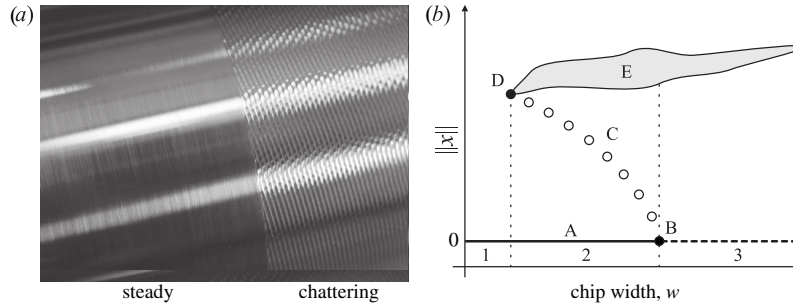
Panel (a) shows a photograph of a machined workpiece. The smooth surface to the left was produced by steady cutting, whereas to the right we may observe so-called *sunflower spirals* which are a typical result of tool chatter (photograph provided by Ideko). Panel (b) depicts a schematic bifurcation diagram showing typical dependence of the tools motion on the chip width w . Here solid / dashed lines represent respectively stable / unstable steady-state cutting. From the Hopf point B an unstable period-one branch marked C emerges. Our interest is in point D, which denotes the onset of chattering motions at E.
